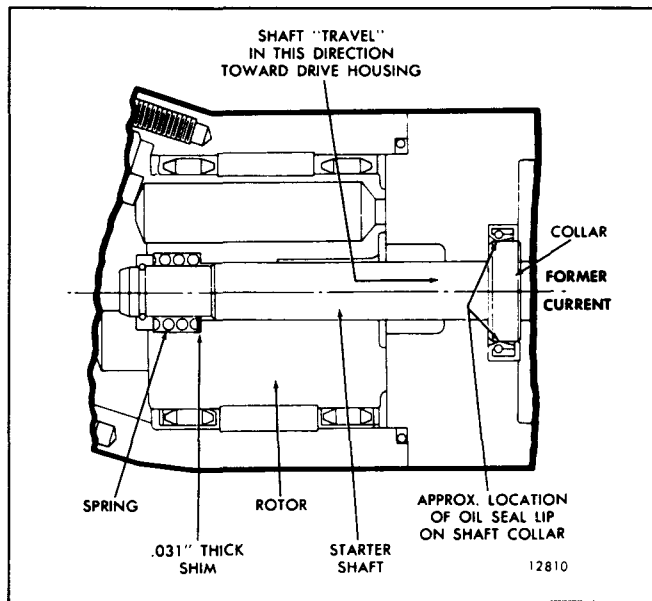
Location of Starter Shaft Compression Spring Shim (Series "20" Motor)
